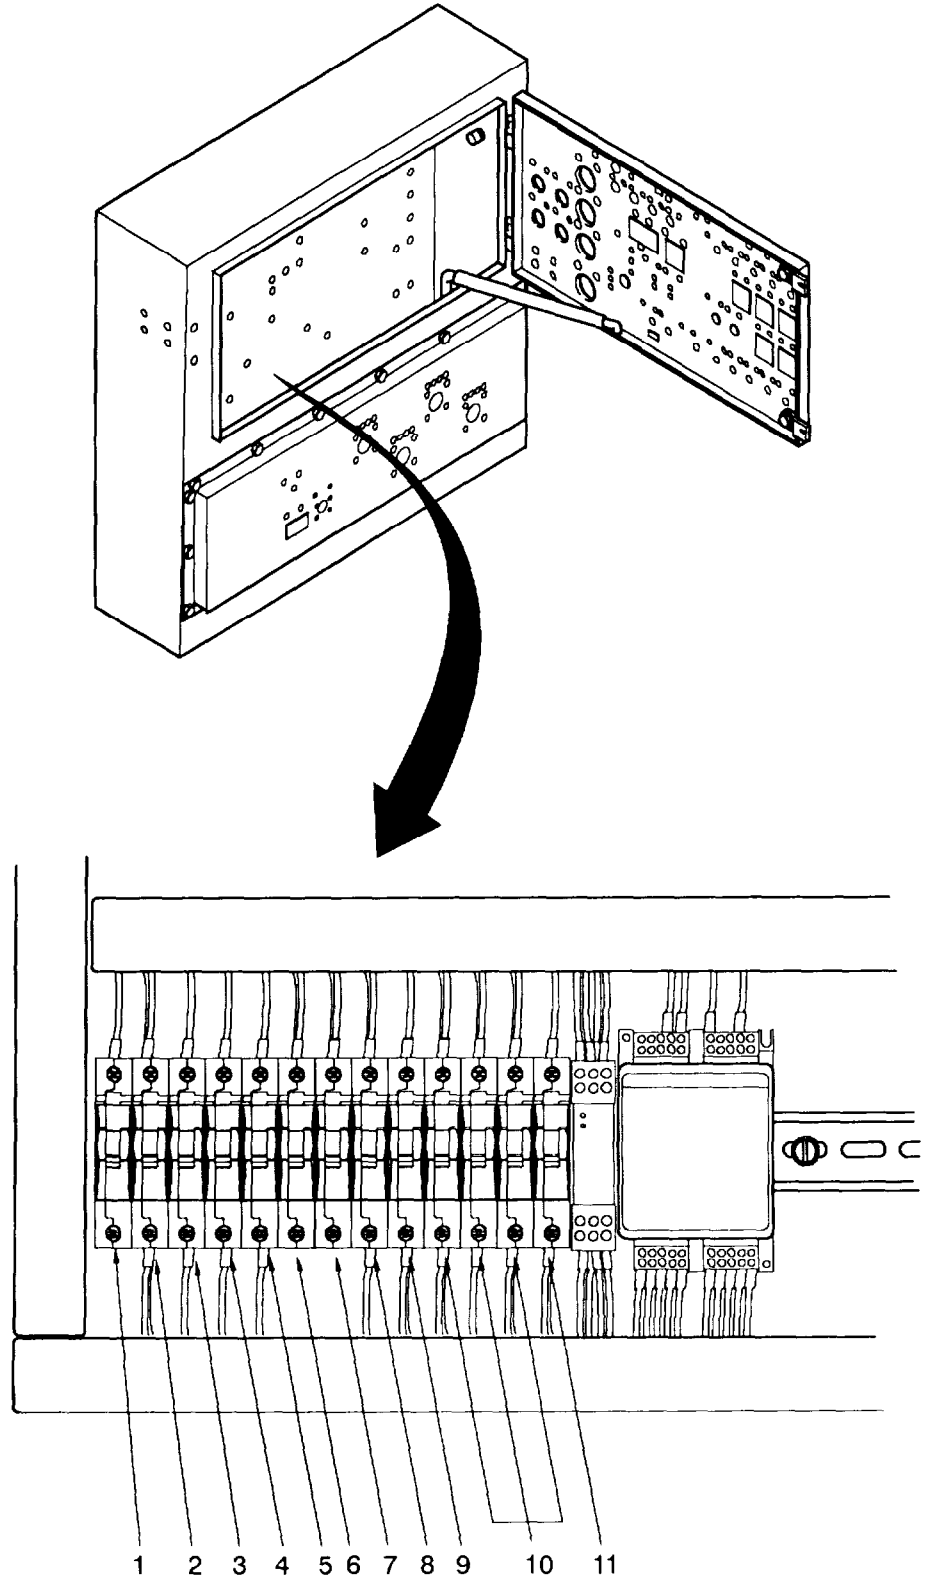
Control Cabinet Assembly, Circuit Breakers (sheet 1 of 2),
